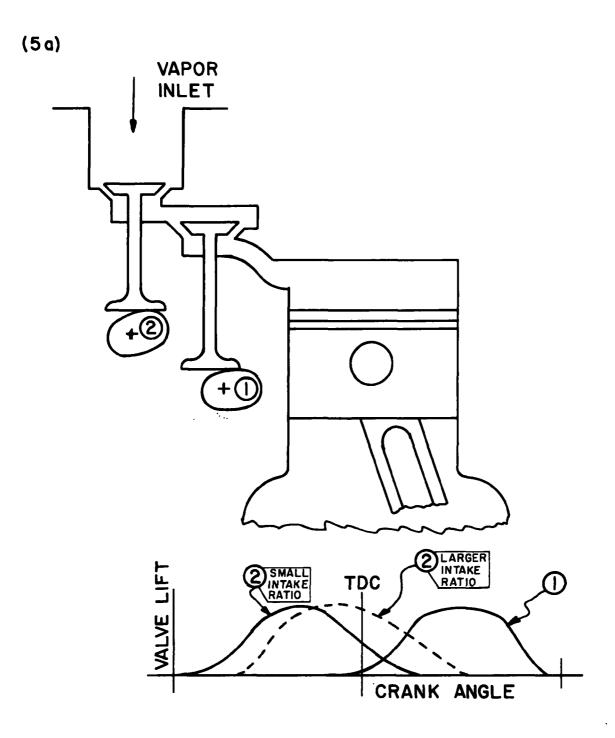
1 Two Inlet Valves in Series, Variable Cut-Off Mechanism.
